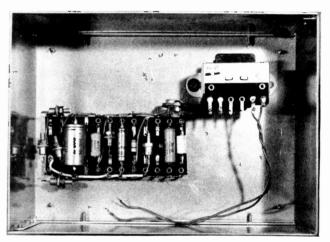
Assembly and wiring details of power supply unit. Both this and the mains transformer are mounted on the chassis base plate (see photograph below)
